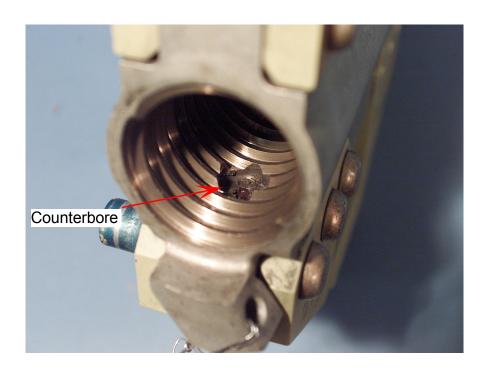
A view of the Acme nut grease fitting counterbore after additional samples were removed. (Nut s/n DCA110(a))
